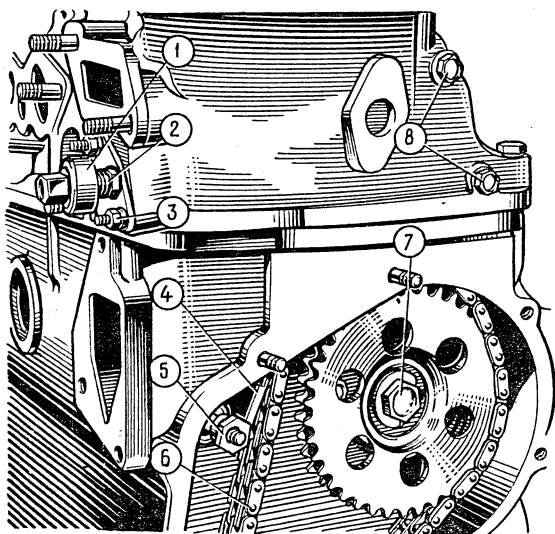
Removing the Chain Tensioner and Damper: 1 - tensioner cap nut; 2 - tensioner body; 3 - tensioner fastening nut; 4 - tensioner shoe; 5 - shoe bolt; 6 - camshaft drive chain; 7 - oil pump drive shaft sprocket bolt; 8 - damper bolts
